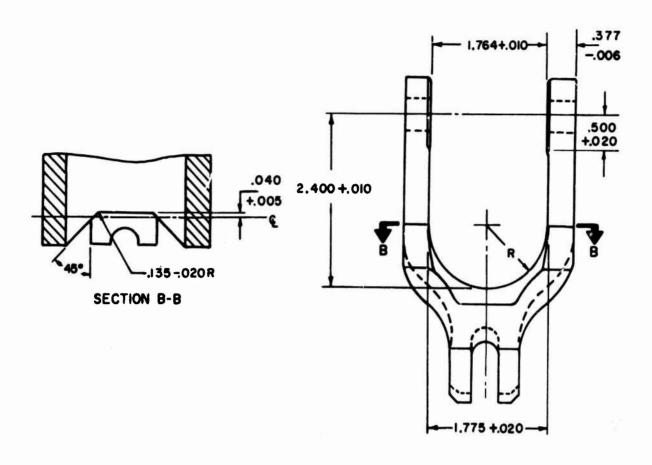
Dimensional tolerances of trigger accelerator component
